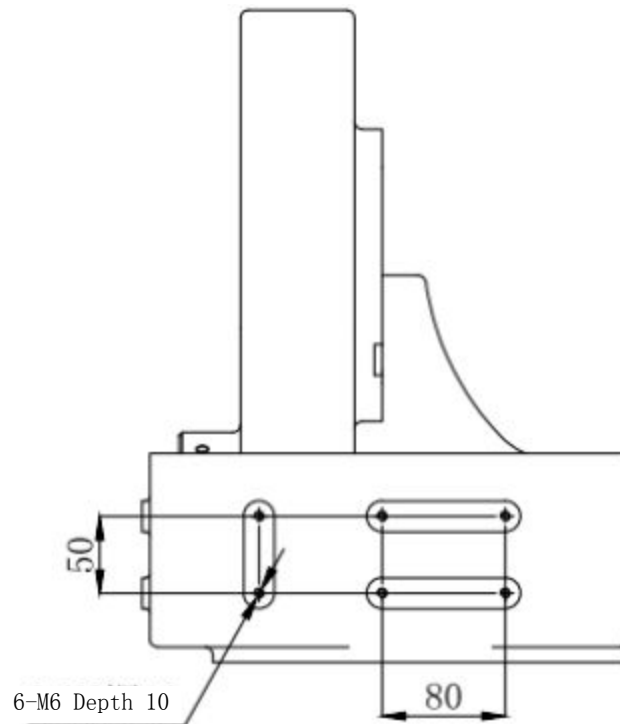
Forearm Auxiliary Mounting Hole Dimensions of SR210
